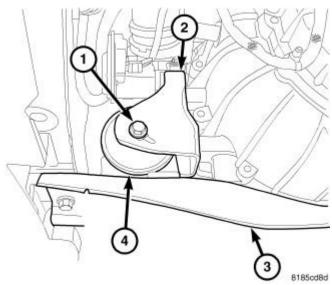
FRONT MOUNT THROUGH BOLT Courtesy of CHRYSLER LLC
